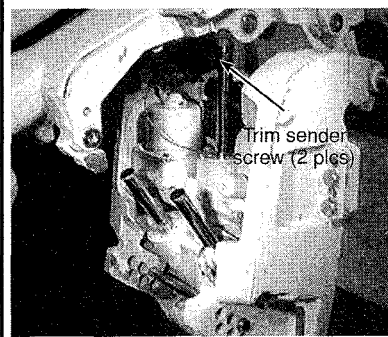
then lower the motor onto the pin and carefully adjust the switch
